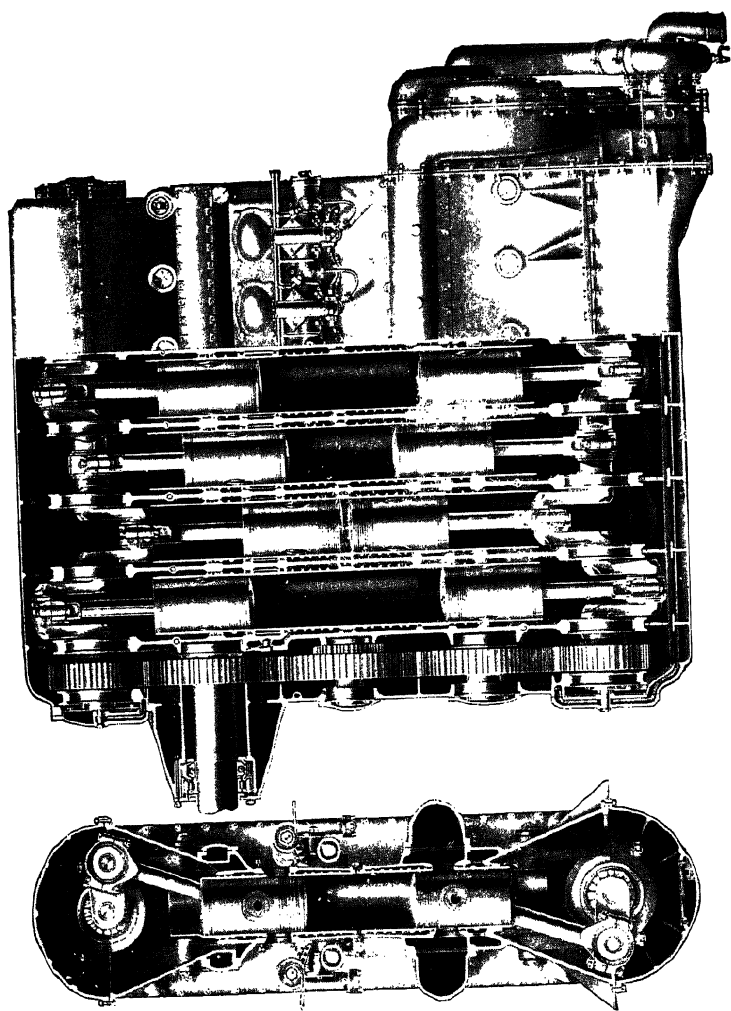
Pictorial part-sectional view of the Junkers "Jumo" engine.
